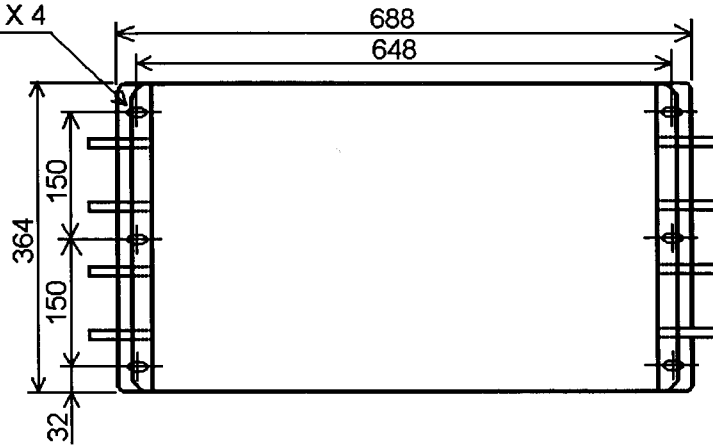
Outline Dimensions (RF3280-F11, RF3400-F11)
